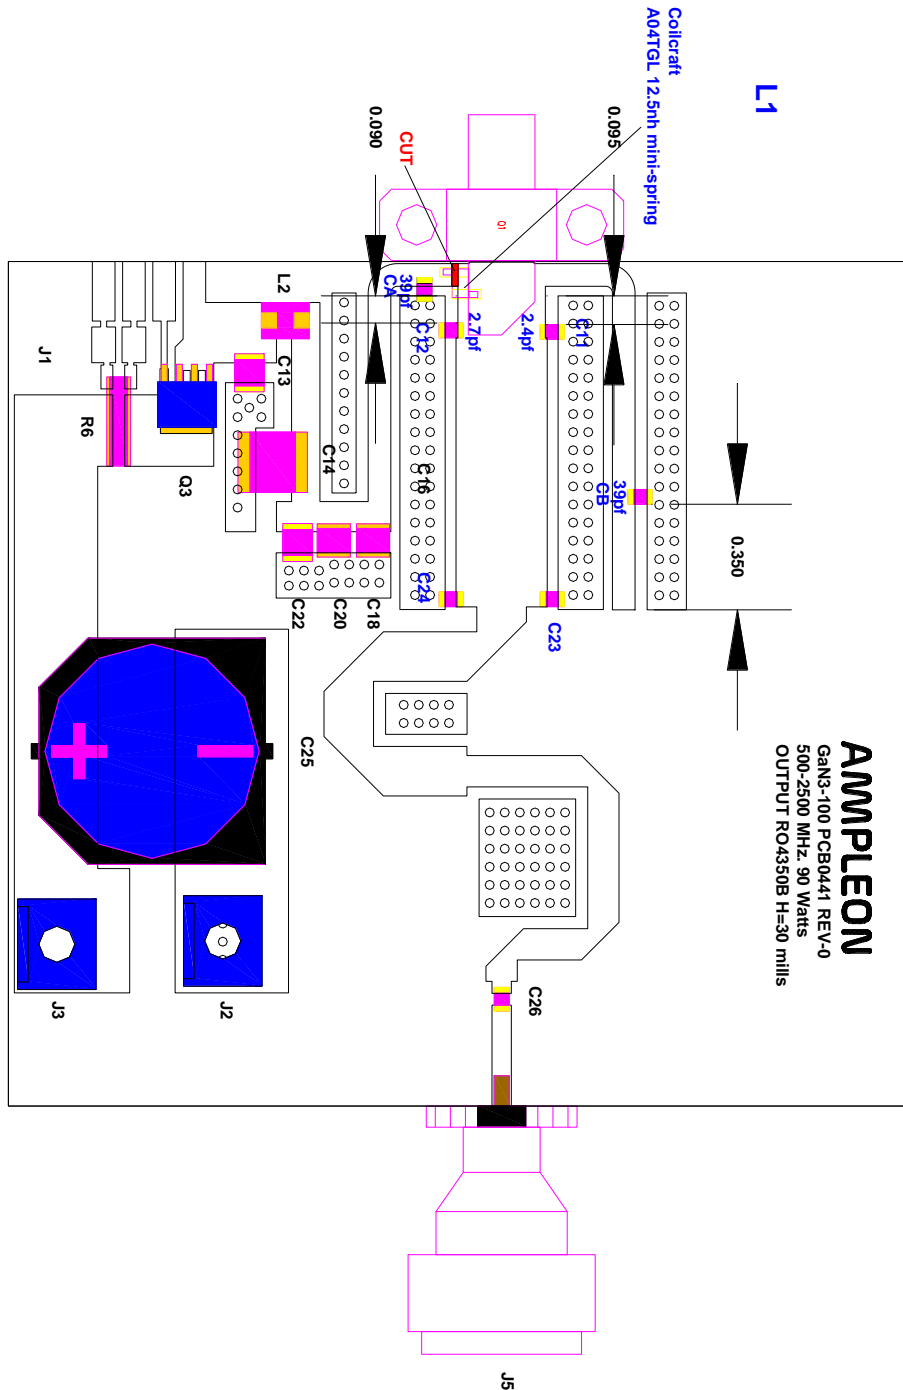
Output PCB Layout with reference designators, added components, and PCB cuts.
